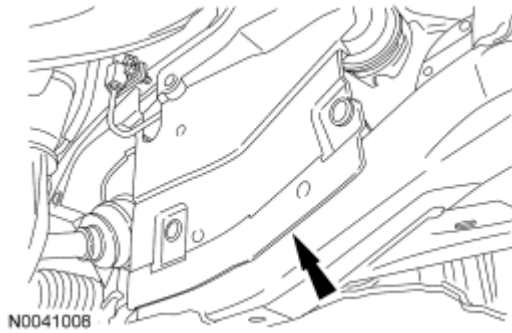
Locating RH Front Structure-To-Subframe Splash Shield
